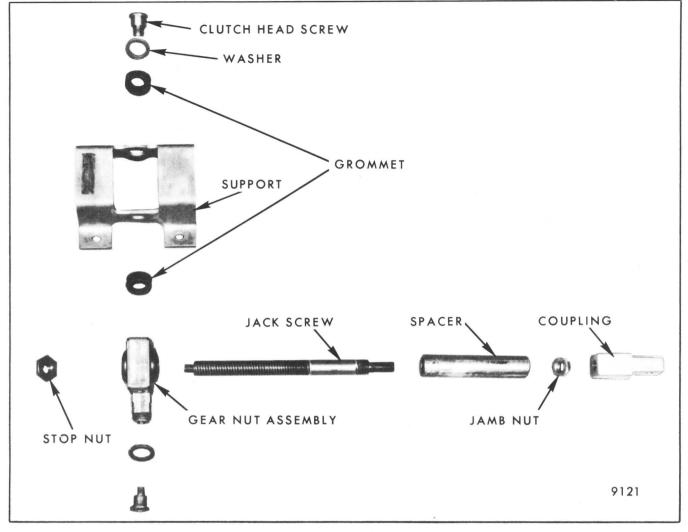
Power Reclining Seat Back Actuator - Disassembly and Assembly
